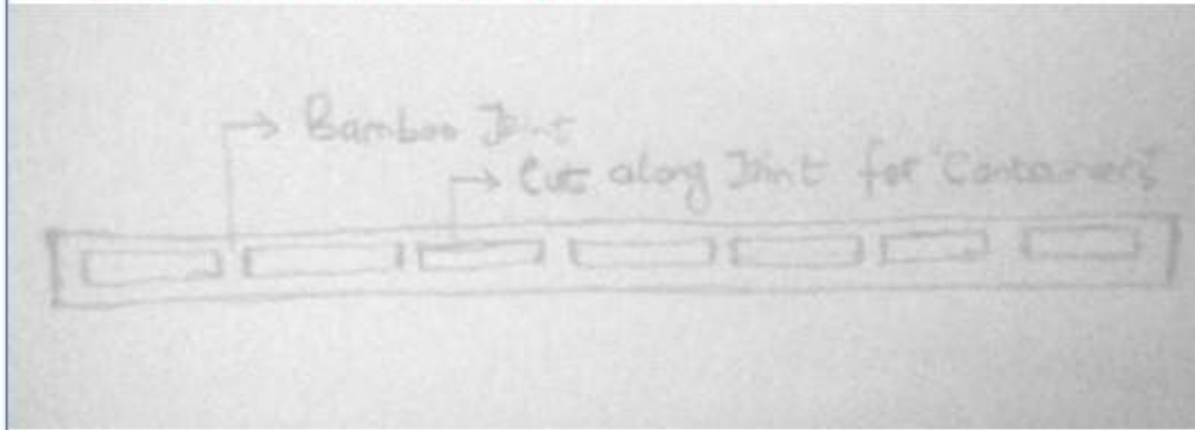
; Marking Bamboo wood and cutting along joints, source: Author, 2014
